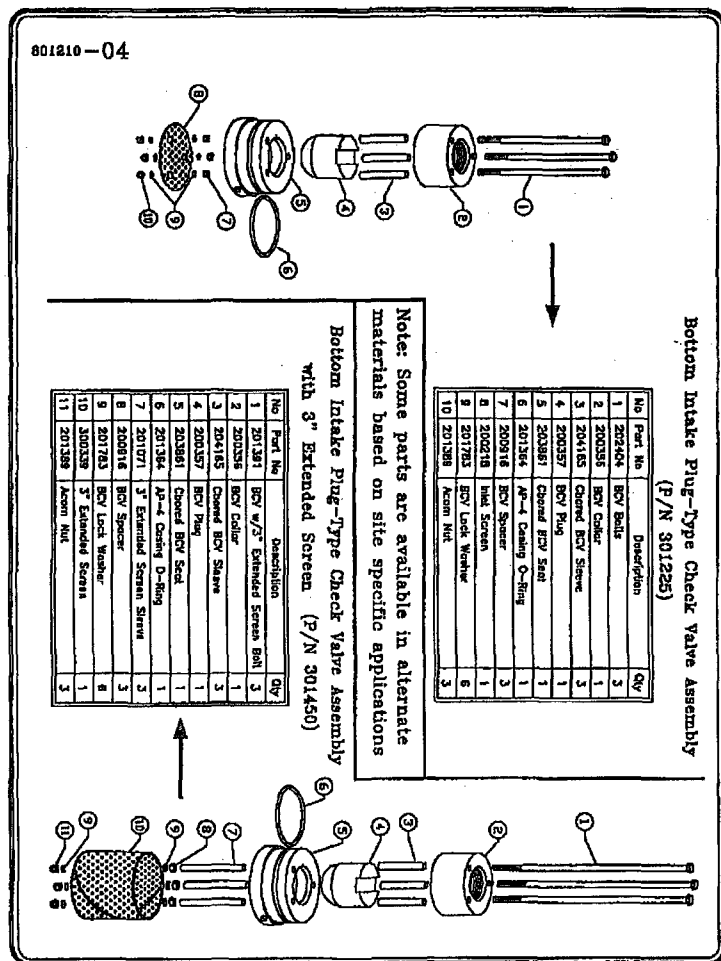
Bottom Intake Plug-Type Check Valve Assembly
